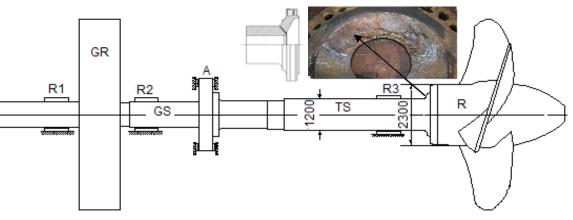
Appearance of basic components of the generator, appearance of the fracture surface Slika 2. Shema osnovnih komponenata generatora i izgled prelomne površine
